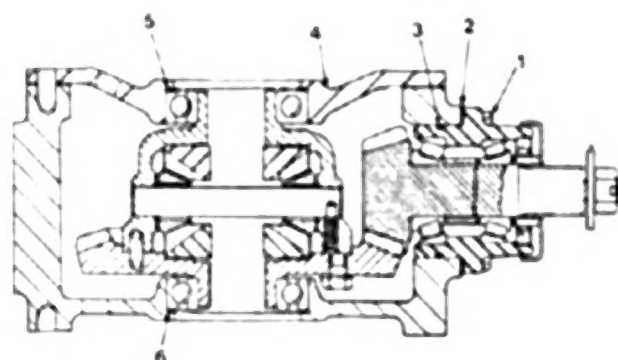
Sectional view of bevel drive gears and differential assembly removed from front drive axle.
